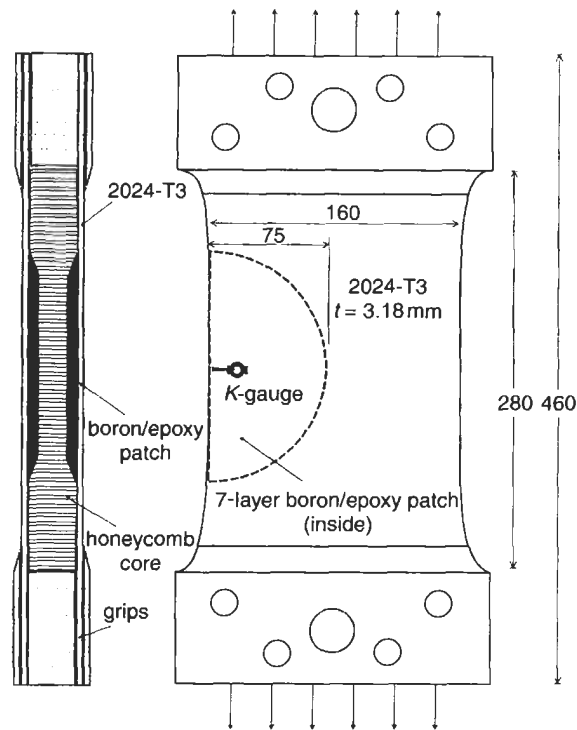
Patched 2024-T3 specimen showing location of K-gauge for a crack with length $a = 10$ mm.
